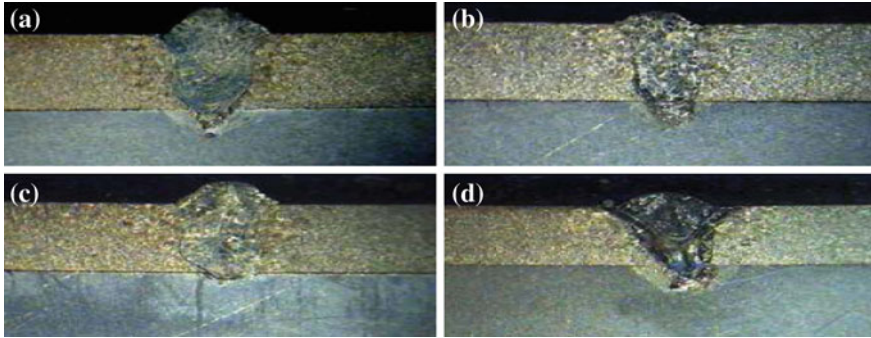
a Welding pool specimen 1, b Welding pool specimen 4, c Welding pool specimen 8 and d Welding pool specimen 14. Effect of the welding parameters and the variation on the total weld pool dimensions
